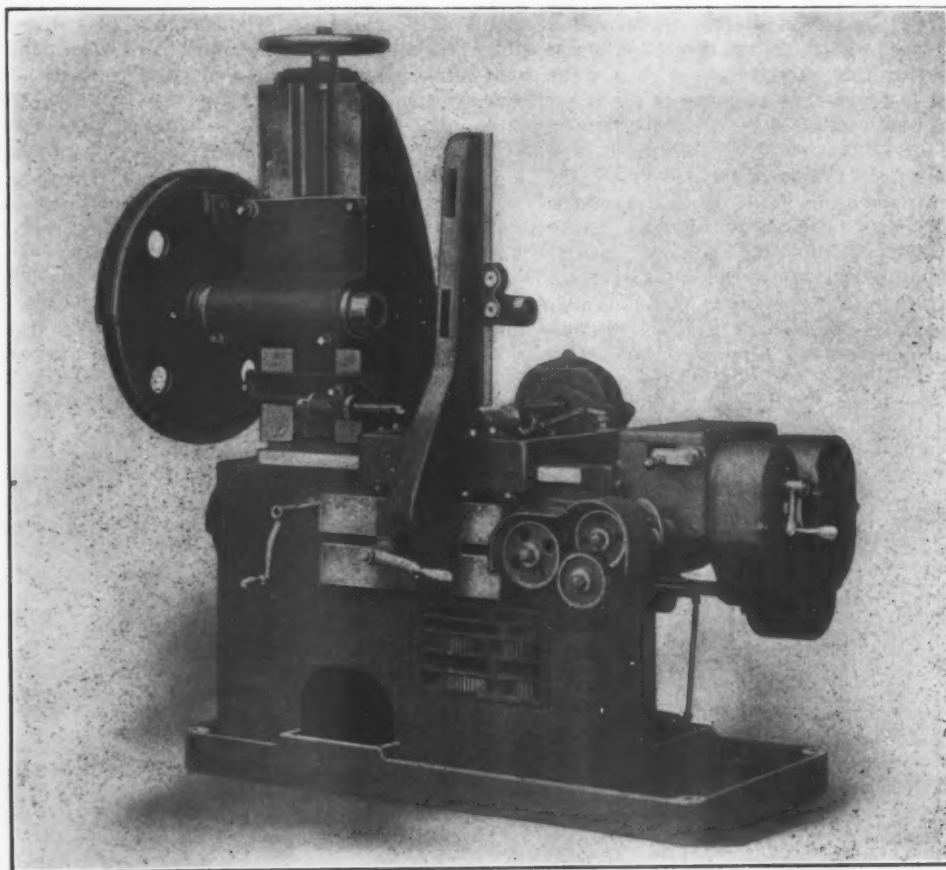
The New Gear Cutter Built by the Cincinnati Shaper Company, Cincinnati, Ohio.
